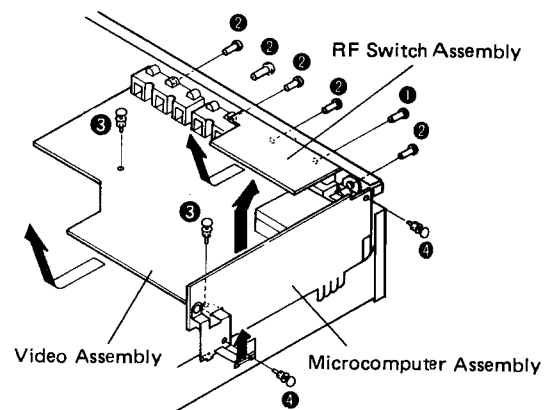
How to demount the Video Assembly, RF switch Assembly and the Microcomputer Assembly
